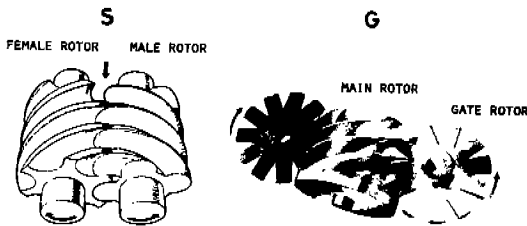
SRM (S) and Globoid (G) type screw compressors
